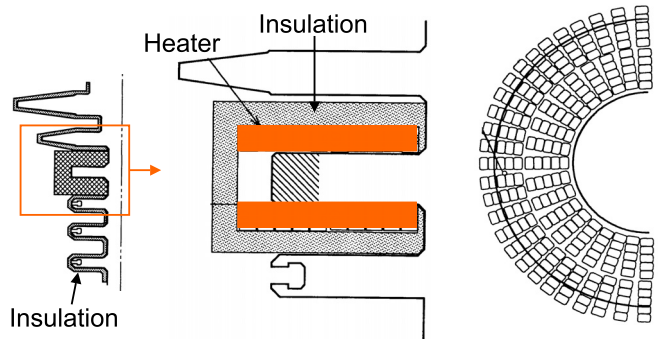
Heater Layout on Local PWHT for Welded Disk.
